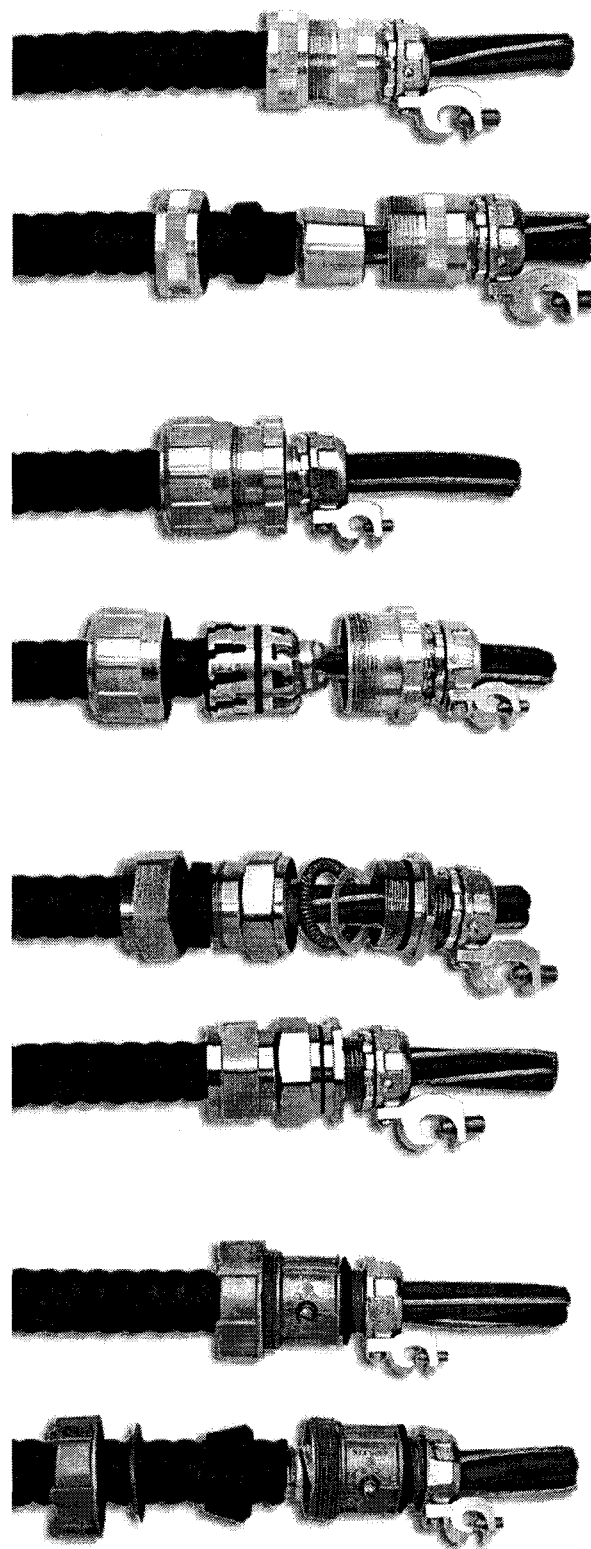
Connectors for 360° Contact with Metal Clad Cable.
